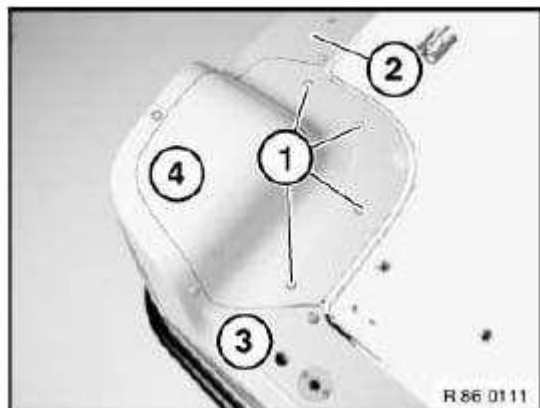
Identifying Rivet Connections & Raise Side Sections
